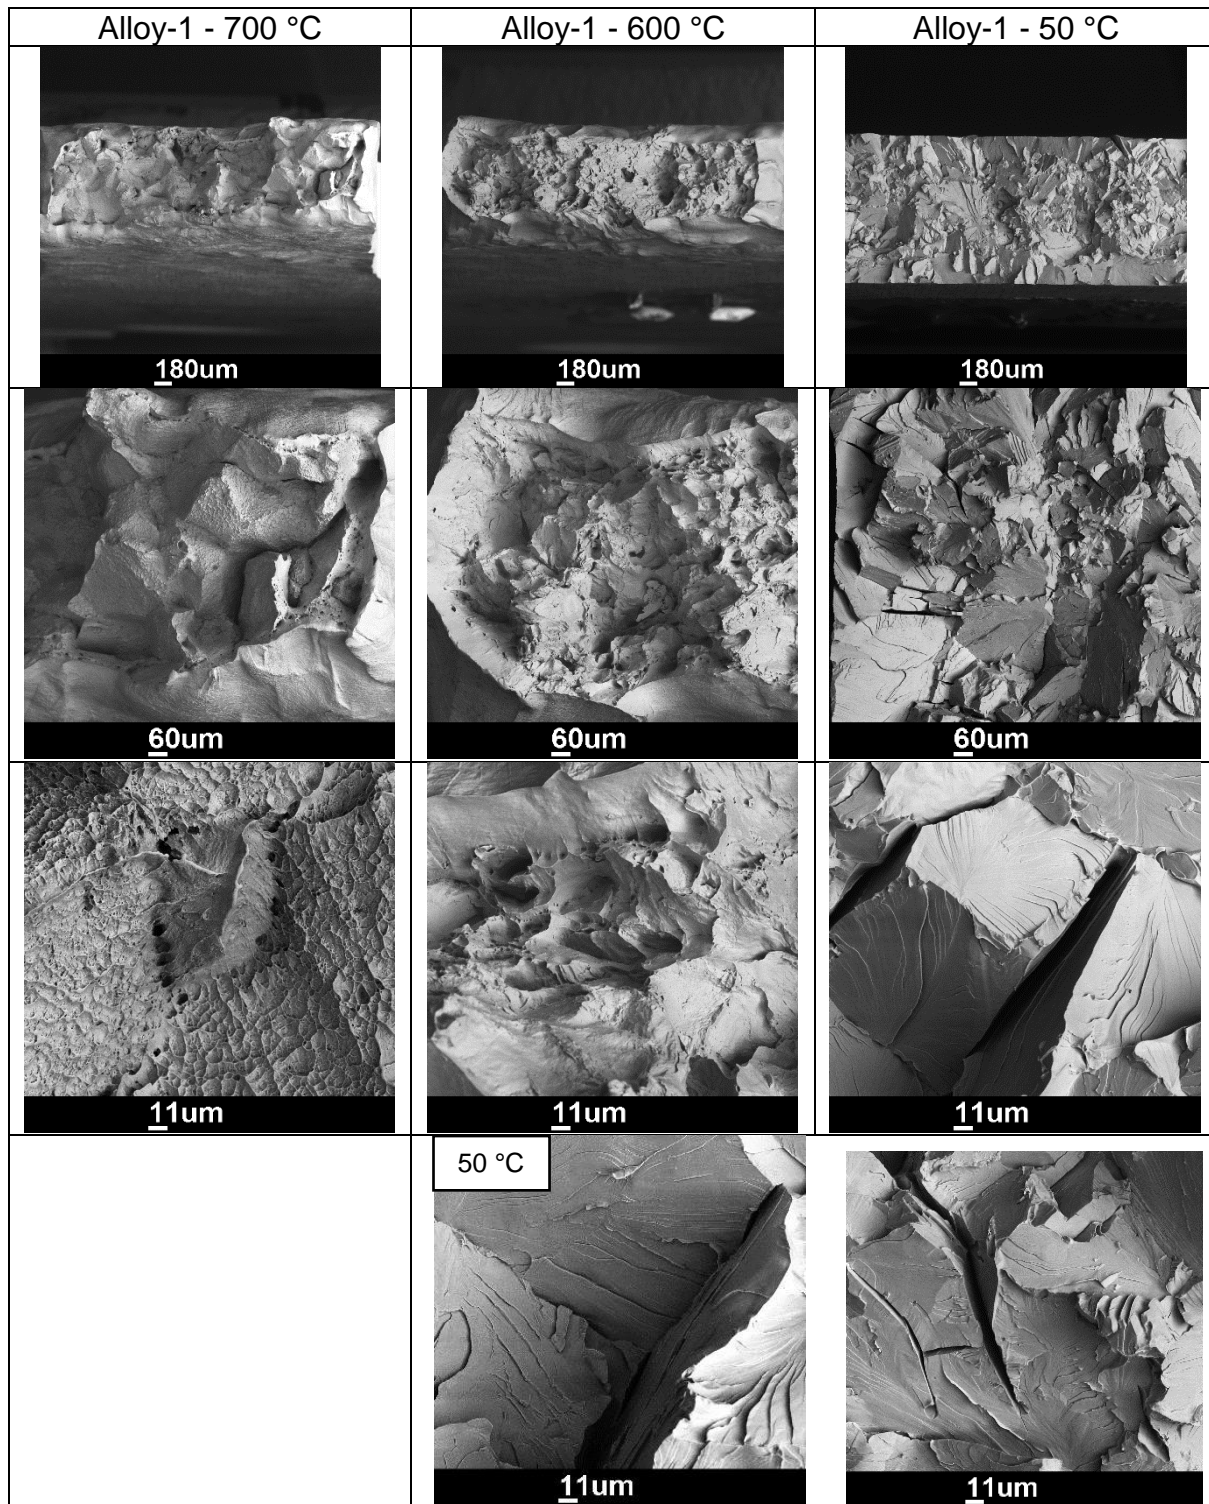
Fracture surface at 700, 600 and 50 °C, Alloy-1
